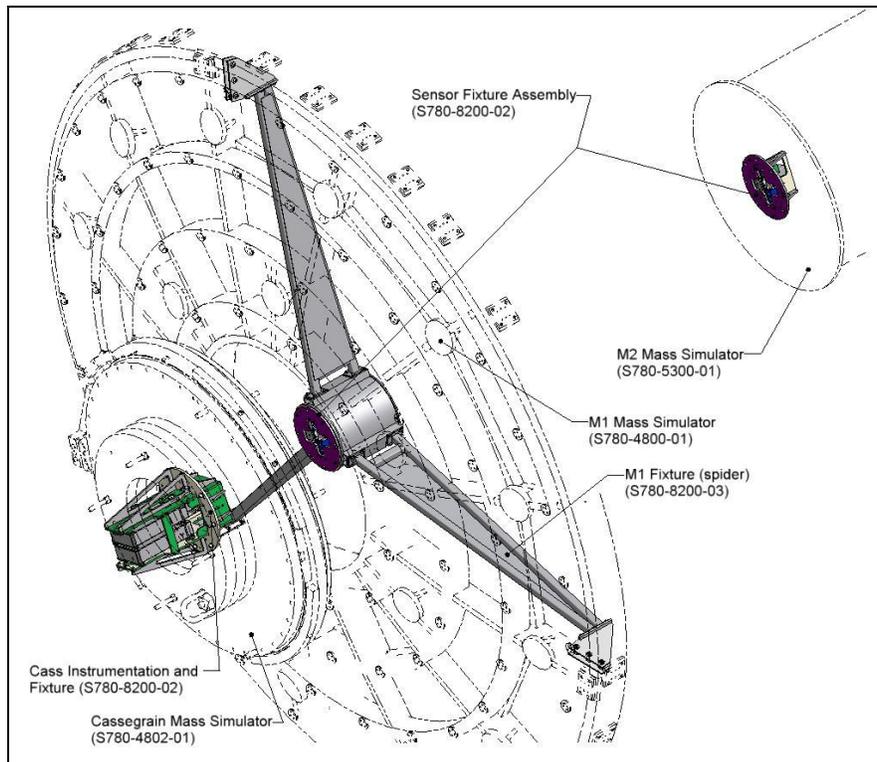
Test fixtures for the M1, M2 and Cassegrain mounting of the test instrumentation.
